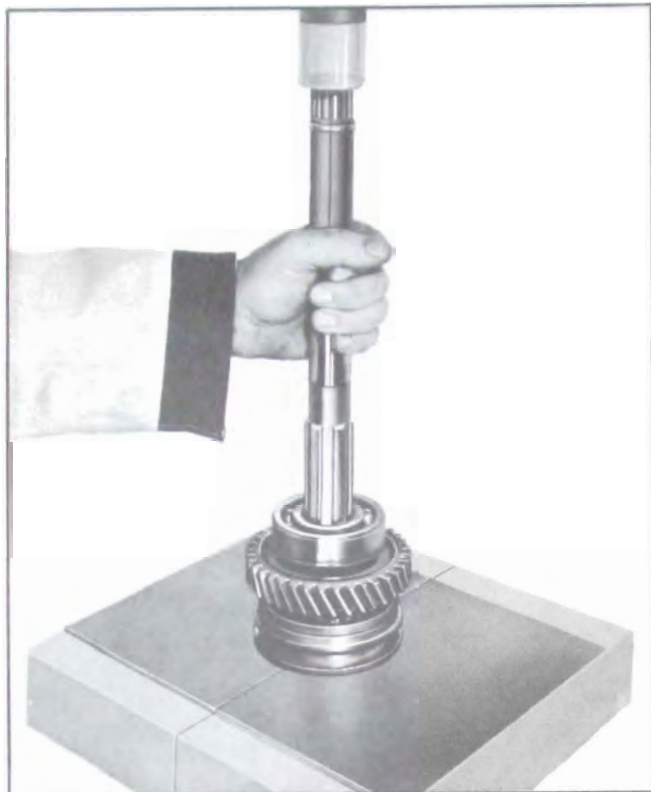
Removing Mainshaft from First and Second Speed Clutch Assembly
